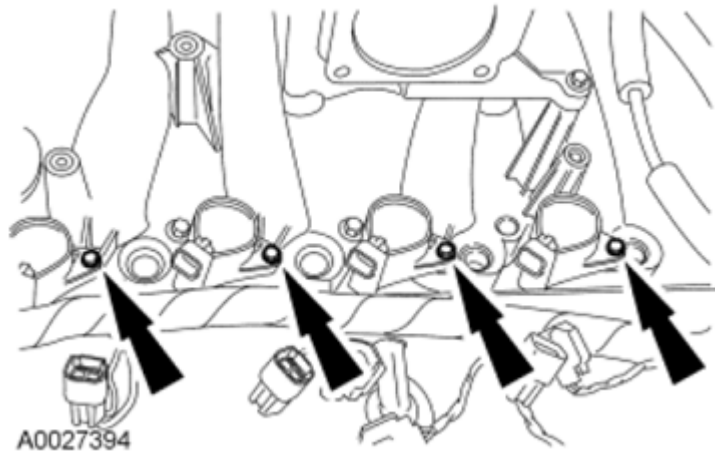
Locating Intake Manifold Crash Bracket
